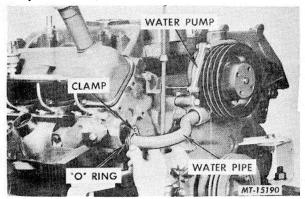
On V-392 engine the water pipe is removed from the water pump and crankcase.
